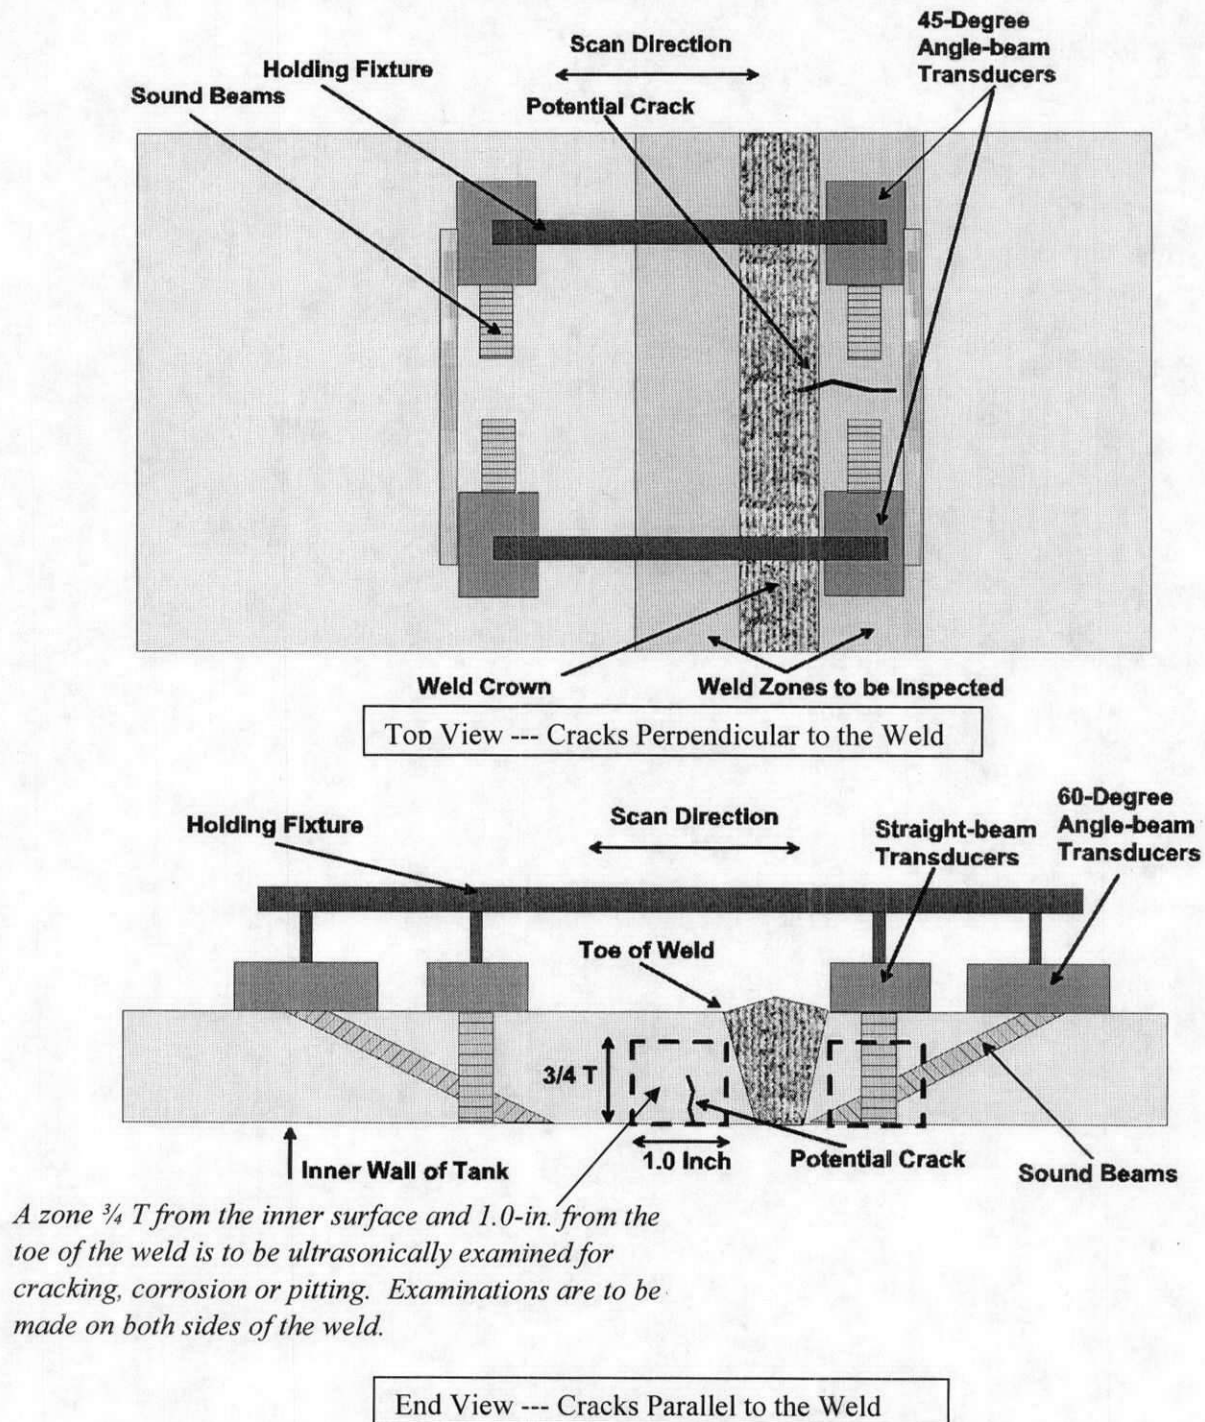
Views of the Weld Zone to be Ultrasonically Examined in the Primary Tank Wall
